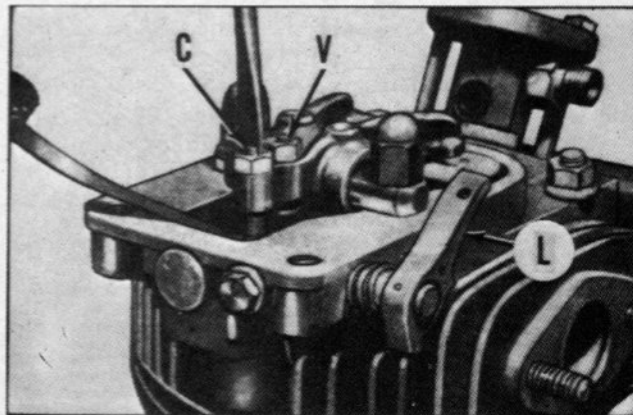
With compression lever (L) in off position, turn adjusting screw (C) so clearance is 0.9-1.1 mm (0.035-0.043 in.) between screw and shaft. Adjusting screw (V) determines valve clearance.
